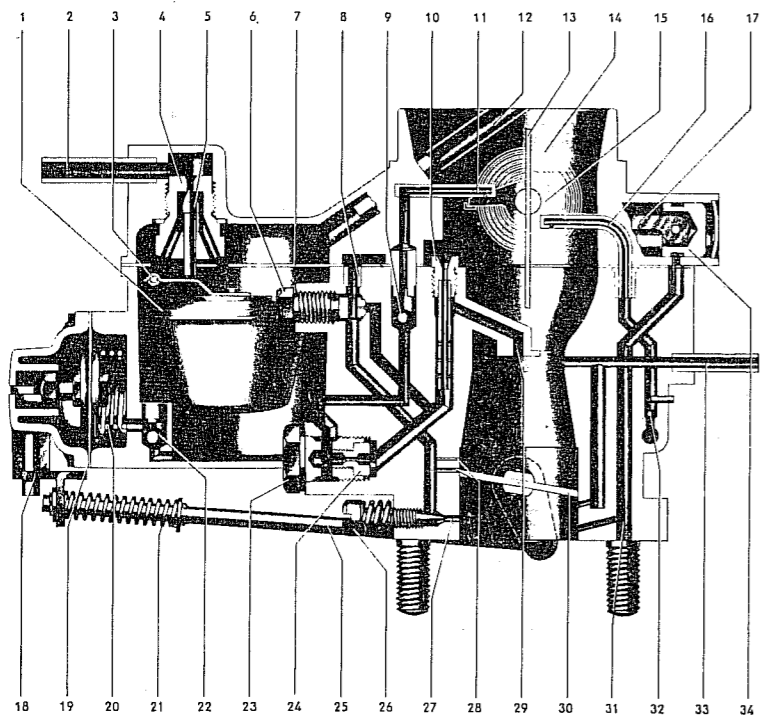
Sectional view of the Solex 28 PICT carburettor
